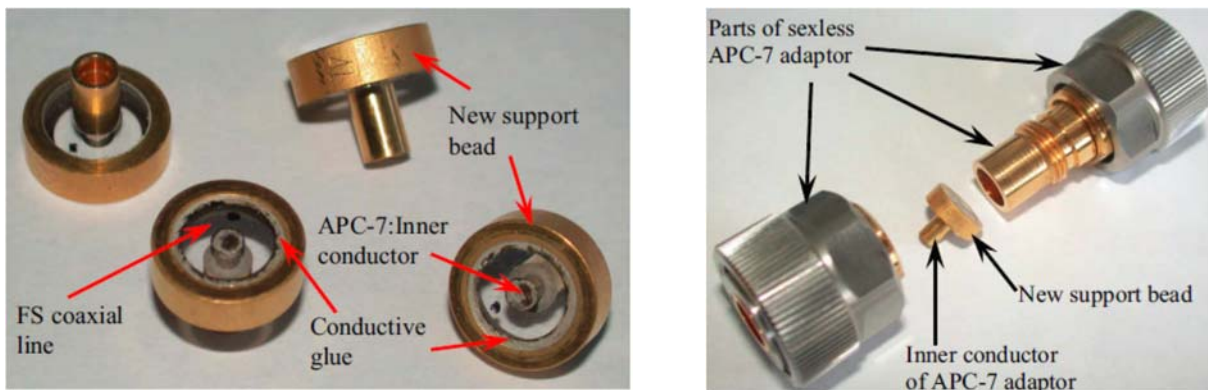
An example of manufactured support beads with inner conductor of APC-7 connector (left) and dis-assembled APC-7 adaptor (right)
